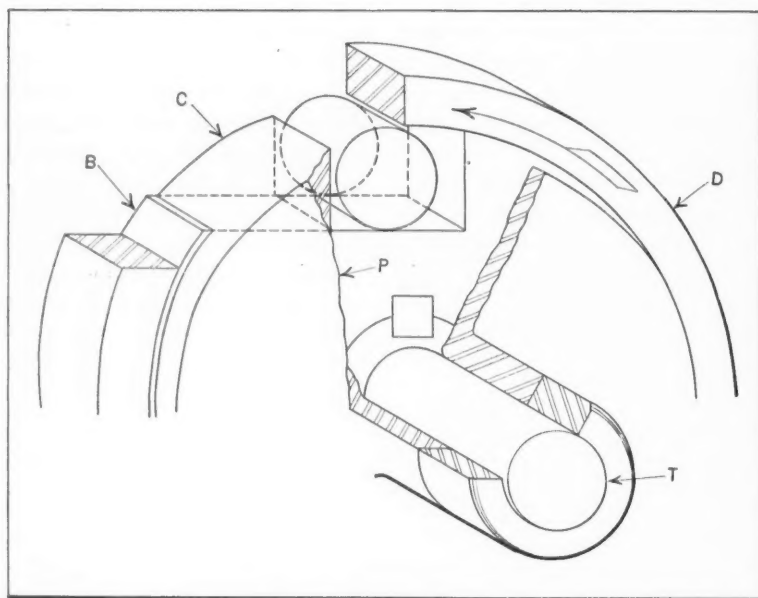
Arrangement of Clutch Members in Feeding Mechanism Shown in Fig. 5
